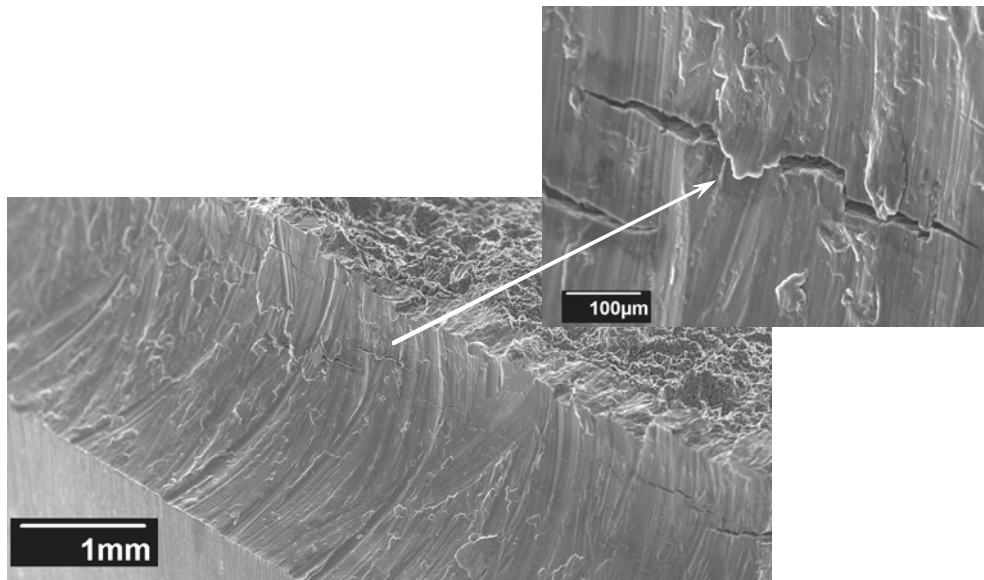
Example of service fatigue cracking in a poorly drilled hole in an AU4SG aluminium alloy wing spar.
